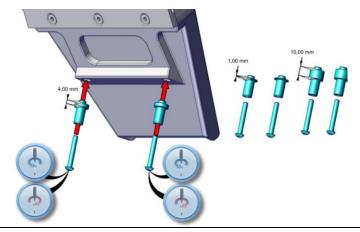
Mounting the scraper bolts for different scraper angles (tangent angles)
